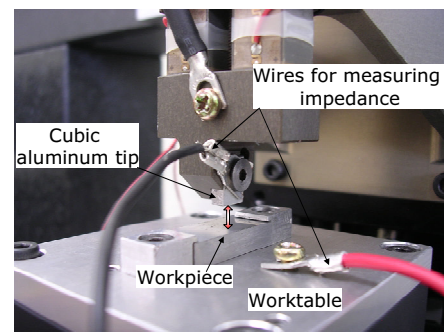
Experimental setup for measuring impedance between tool tip and workpiece
